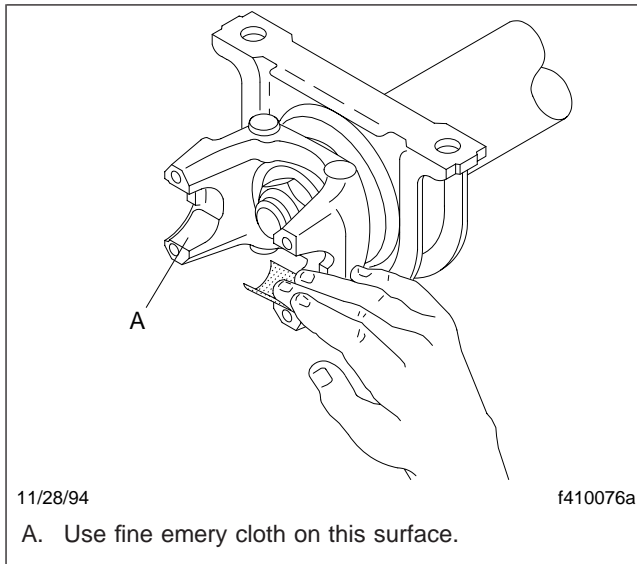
, Smoothing a Half-Round End-Yoke Cross-Hole
